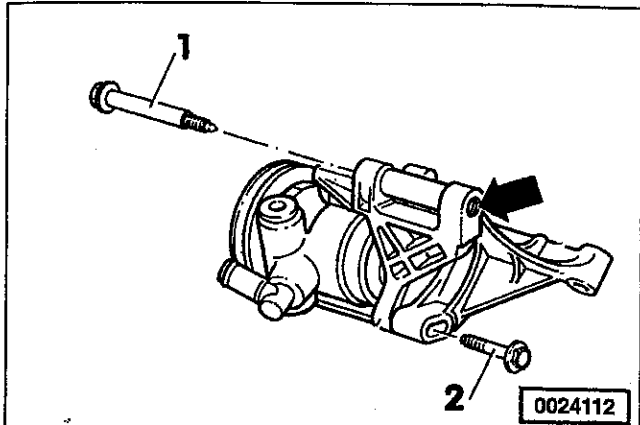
Before installing pump, make sure pivot bolts (1 and 2) are loose. Threaded bushing shown at arrow.
